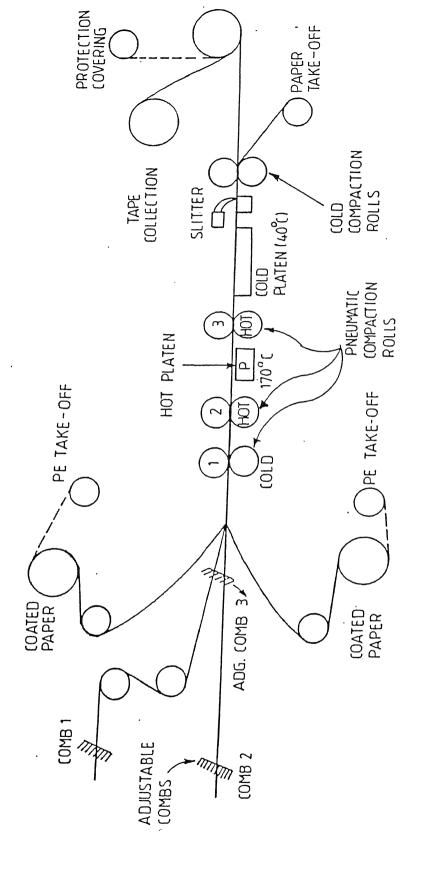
COATING OF SPECIAL GRADE RELEASE PAPER WITH EPOXY RESIN MIXTURE IN IPCL PREPREG MACHINE.
